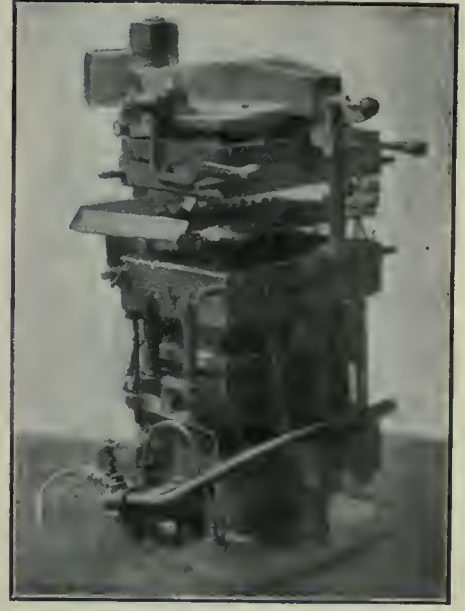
MACHINE WITH DRAG LOWERED AFTER RAMMING.
